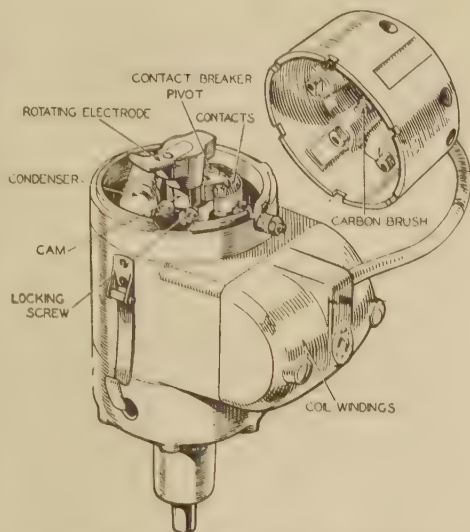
The Lucas Magneto, with Distributor Moulding removed.
